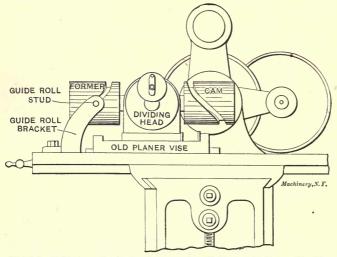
Cutting a Cylindrical Cam with the Attachment shown in Fig. 34
